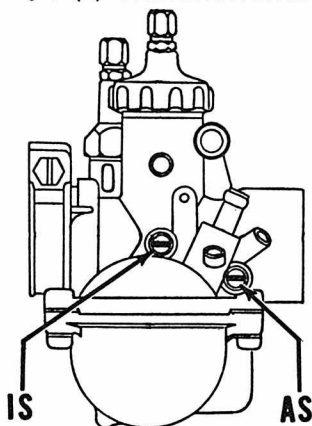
View of carburetor left side showing air bleed adjusting screw (AS) and idle speed adjusting screw (IS). All models are similar.
